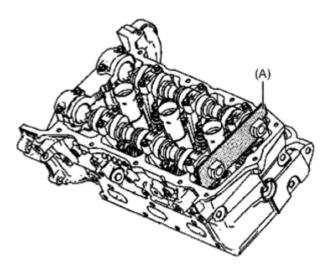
Removing Special Tool From Camshaft (Bank 2) Courtesy of SUZUKI OF AMERICA CORP.
